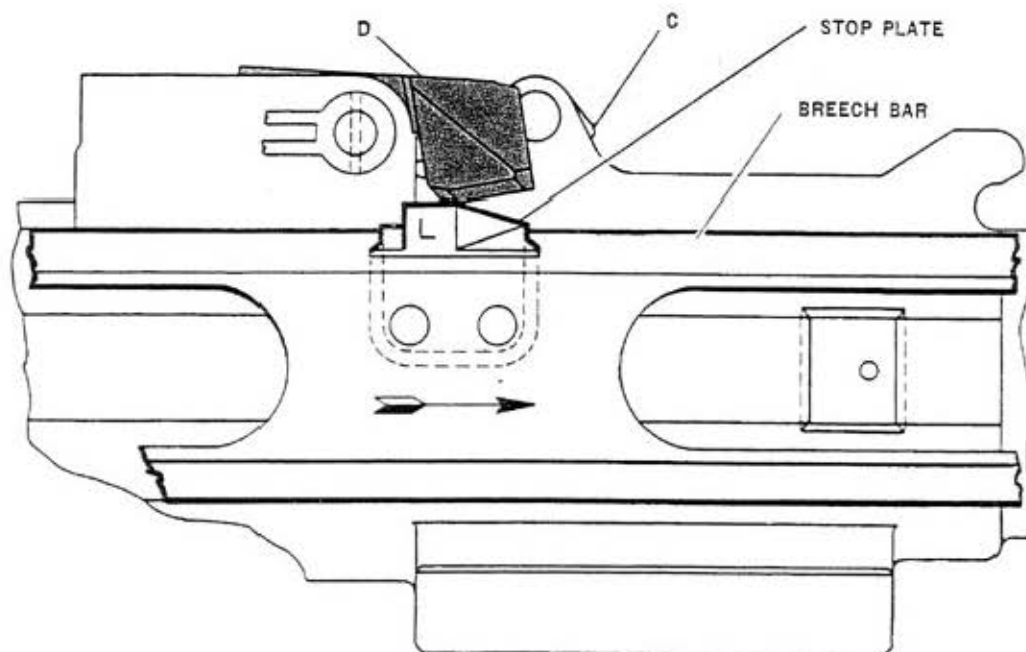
Double Loading Stop Gear. Part of cartridge shell left in chamber as recoil takes place
